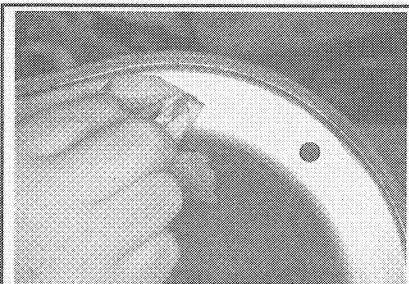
Wipe the cover mating surface using a cloth or other rag and a suitable solvent to remove any contaminants on the surface
